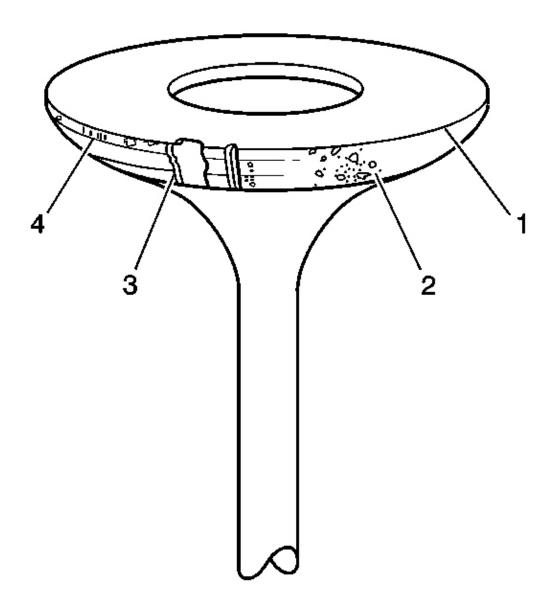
Inspecting Valve Face For Burning, Pitting & Cracking Courtesy of GENERAL MOTORS CORP.
